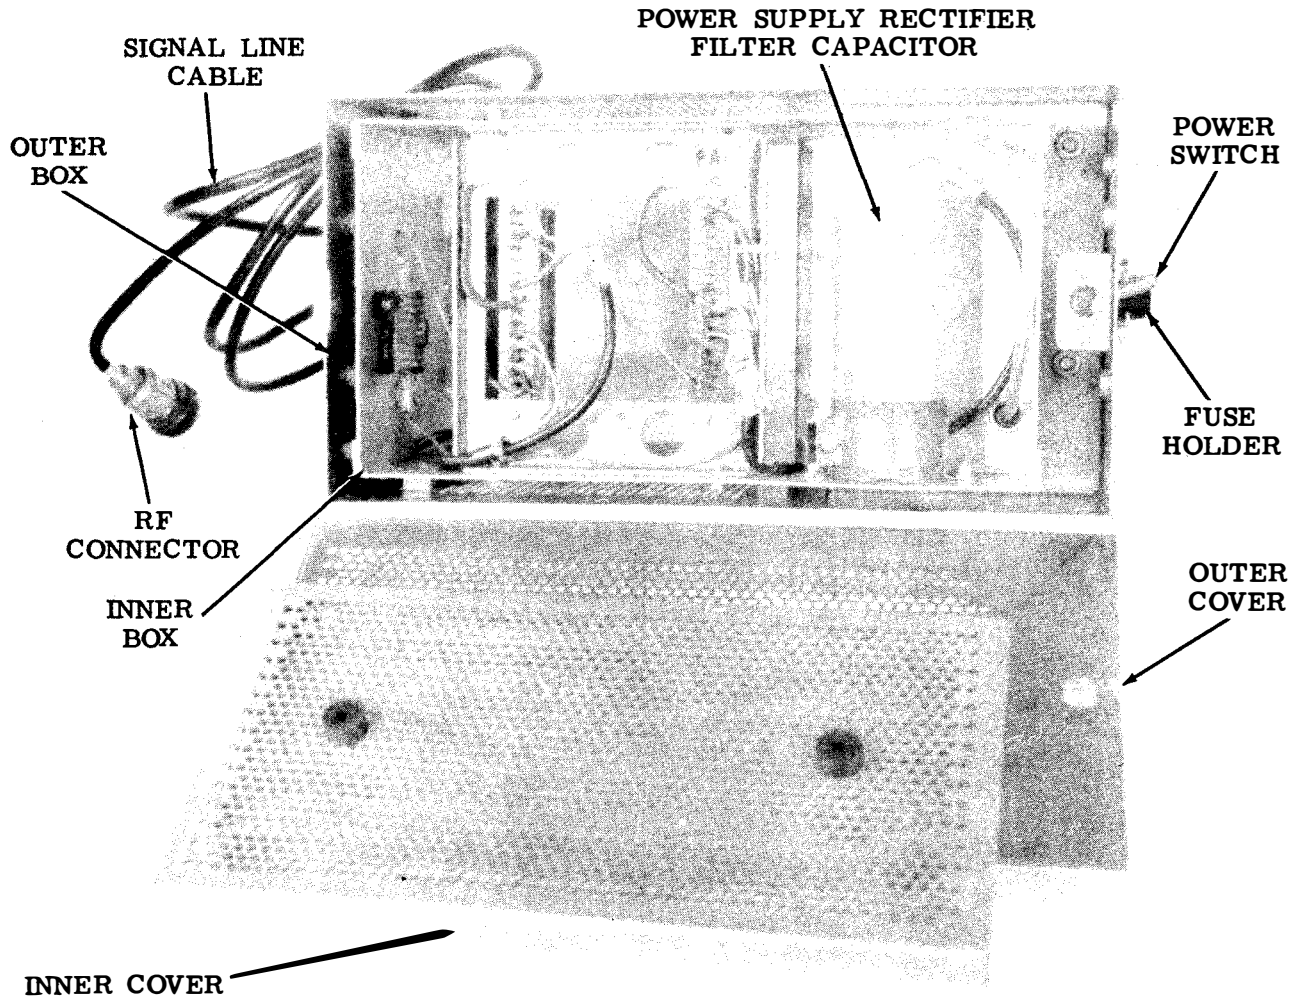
Typical Parts of an ESA - Double Box Construction (Bottom View)
